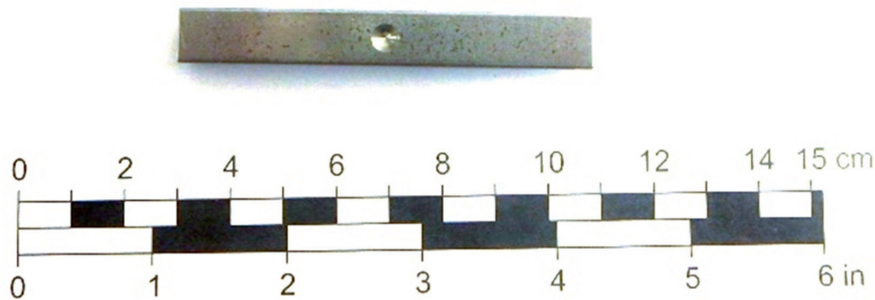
The drilling tool used for testing the SGAT using crushed rock samples. The test piece is 8 centimetres long with a 1 x 1 cm cross-section.
